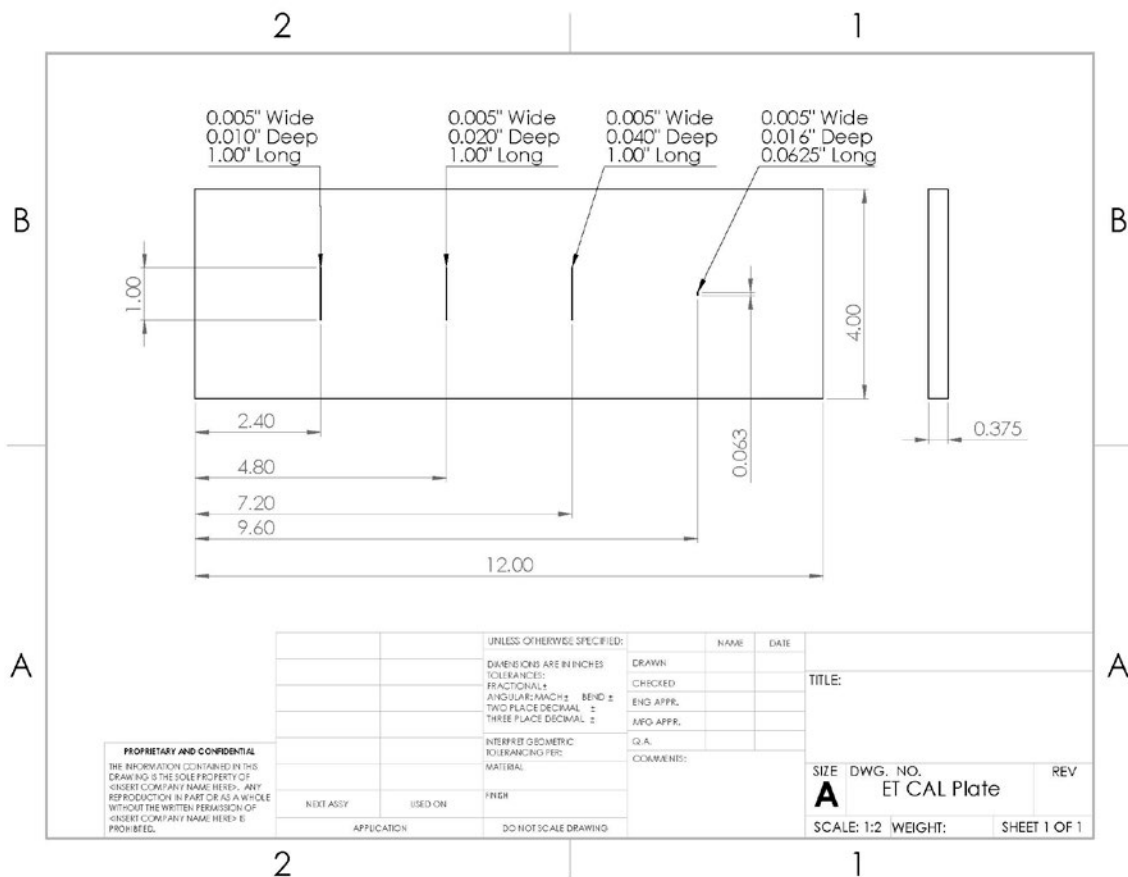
Design Drawing of EDM Notches Fabricated in a SS Calibration Plate and an Inconel 600 Calibration Plate
